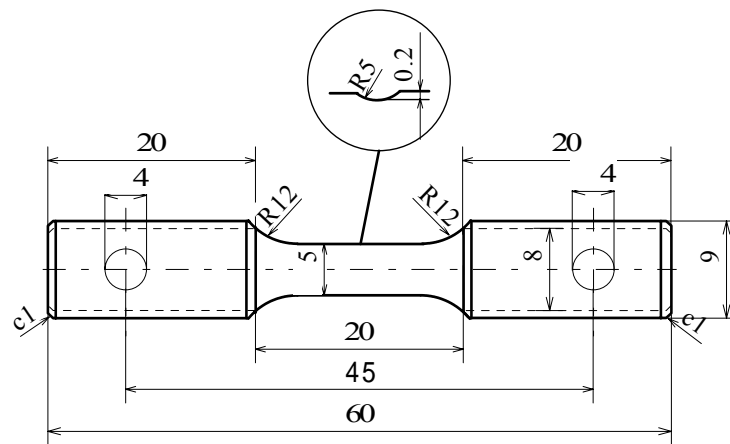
Shape and dimensions of the specimen for pre-strain and fatigue test.
